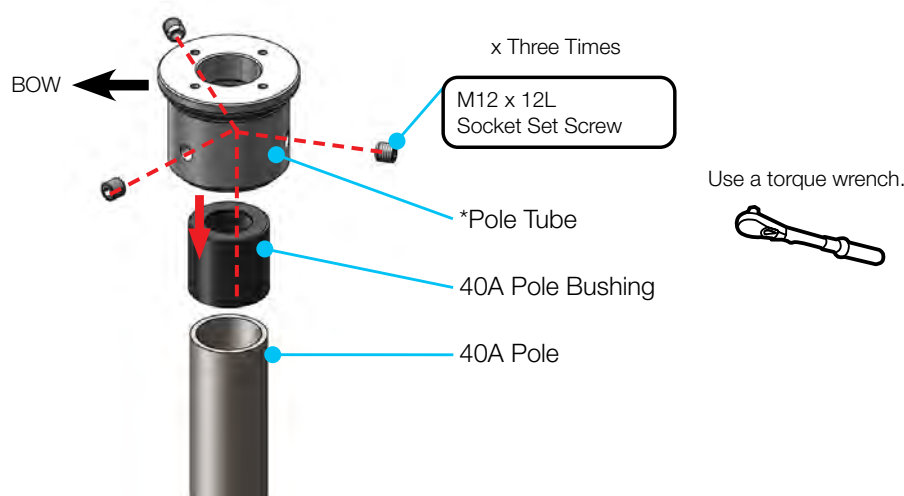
Installing 40A Pole Bushing inside Pole Tube
